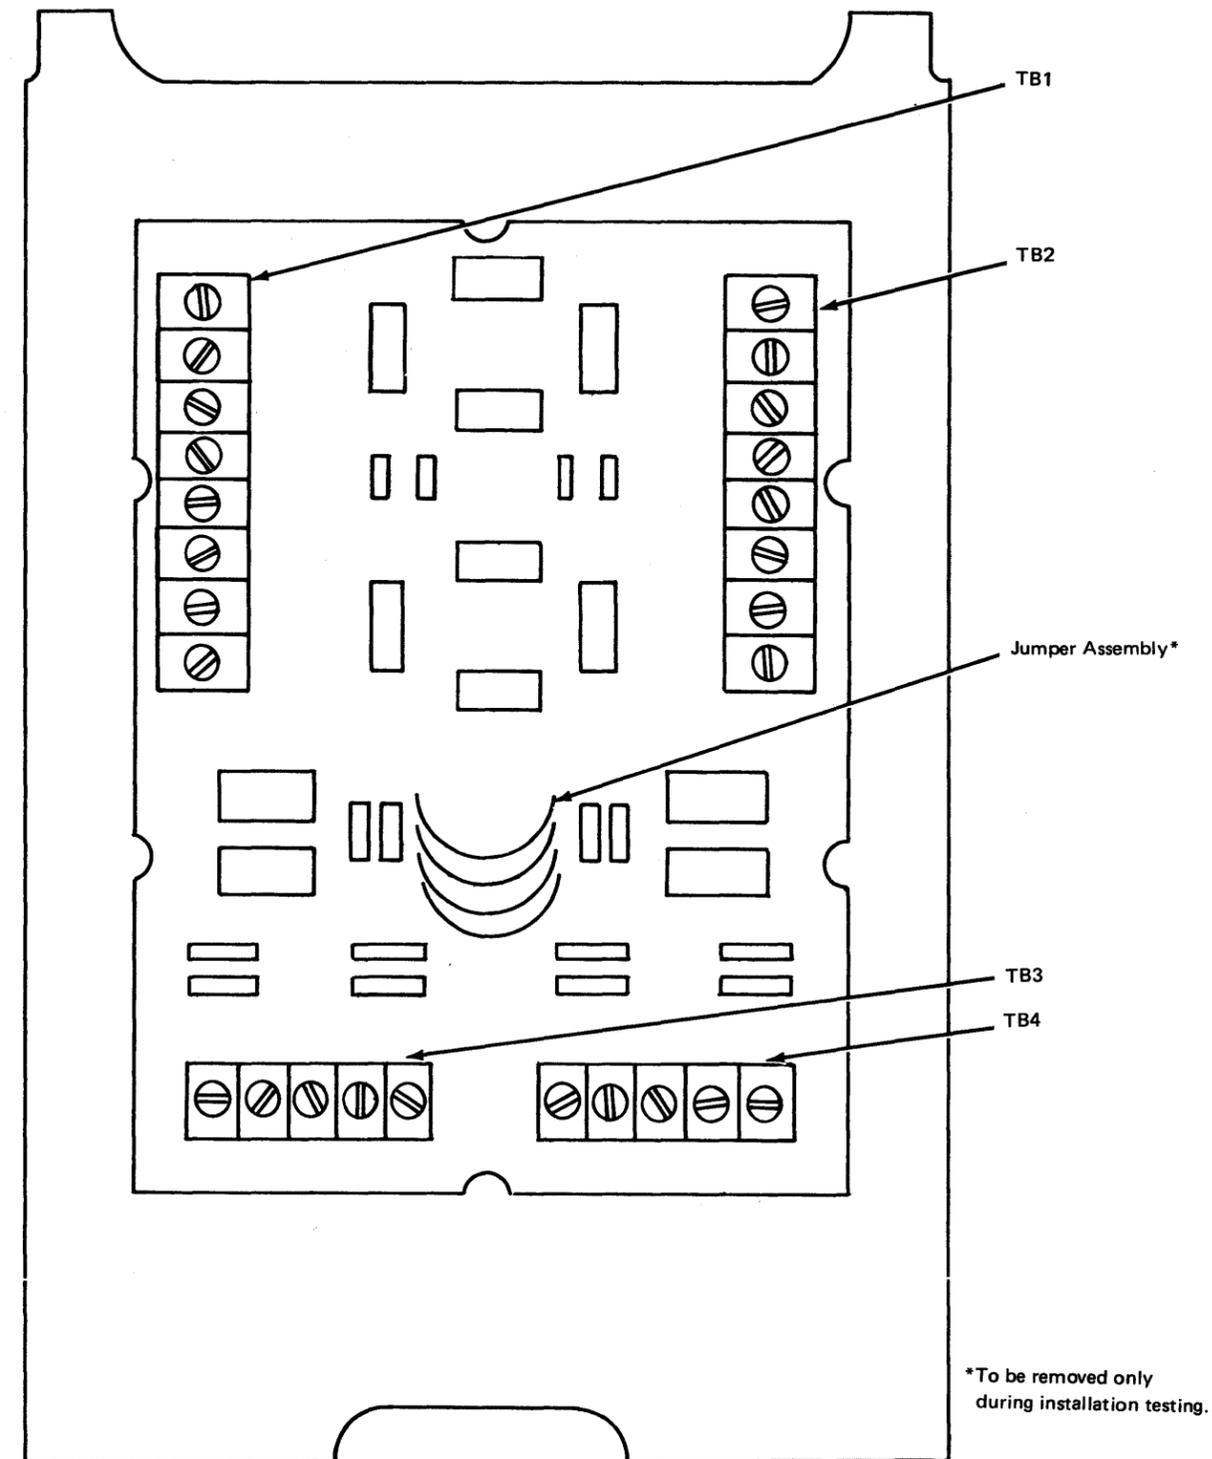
Loop Surge Suppressor (LSS) Circuit Board Assembly
